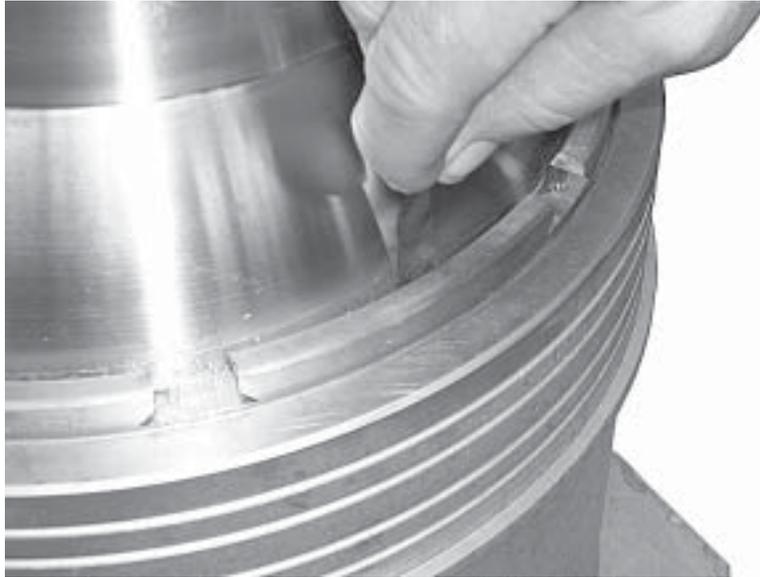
Measuring the Gap Between Thrust Ball and Aft Retainer
